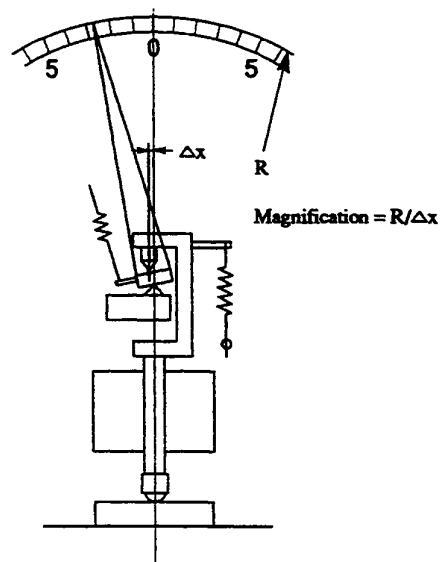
Fig. II Magnifying mechanism with a single lever (early dial indicator)
